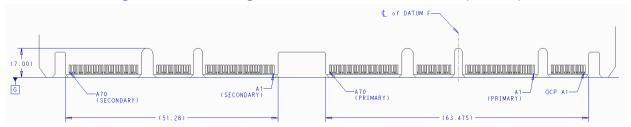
LFF Gold Finger Dimensions – x32 – Top Side ("B" Pins)
